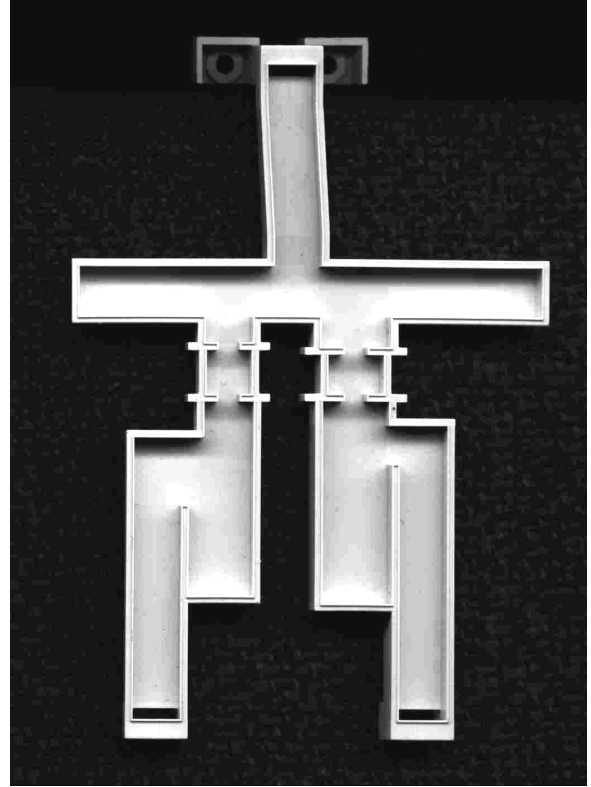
Photograph of a diplexer. The block is fabricated using plastic injection molding.
